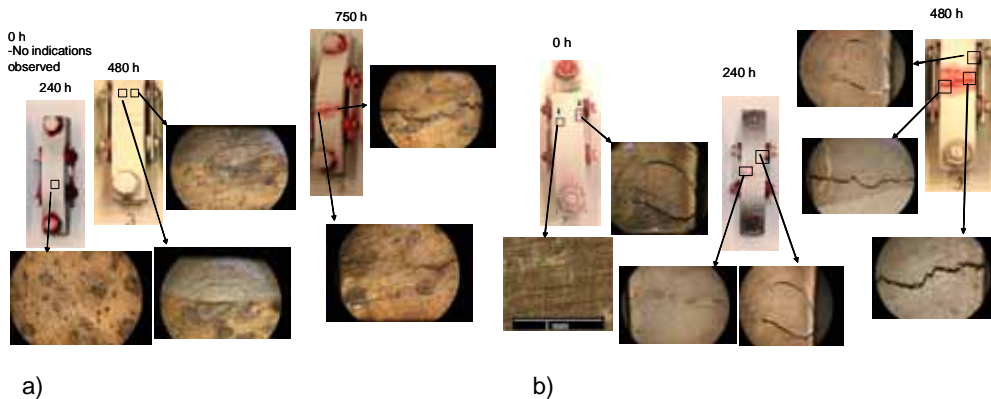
Pure Alloy 182 (specimen No. 3) (a) and pure Alloy 82 (specimen No. 9) (b) cracking after various exposure times. Note that neither in Alloy 182 nor Alloy 82 the opened weld defects do not grow further and final fracture takes place in the middle of the specimens.
